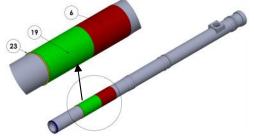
Schematic representation of the outboard bearing and the shielding sleeve mounting
